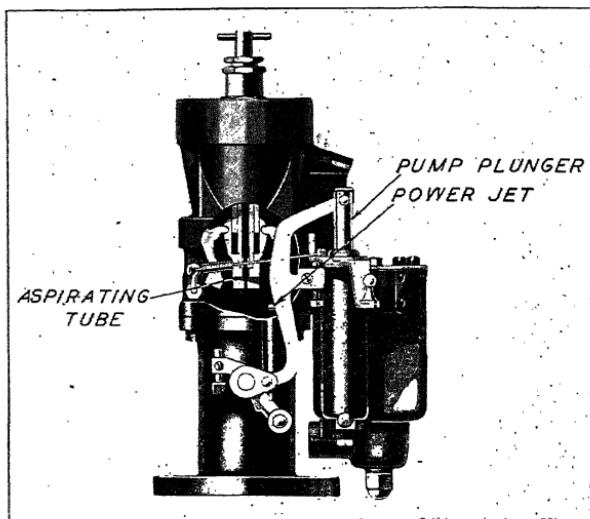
Ford "V-8" Single-Barrel Carburetor
